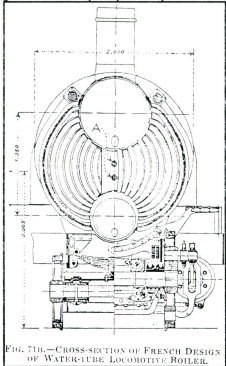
CROSS-SECTION OF FRENCH DESIGN OF WATER-TUBE LOCOMOTIVE BOILER.
